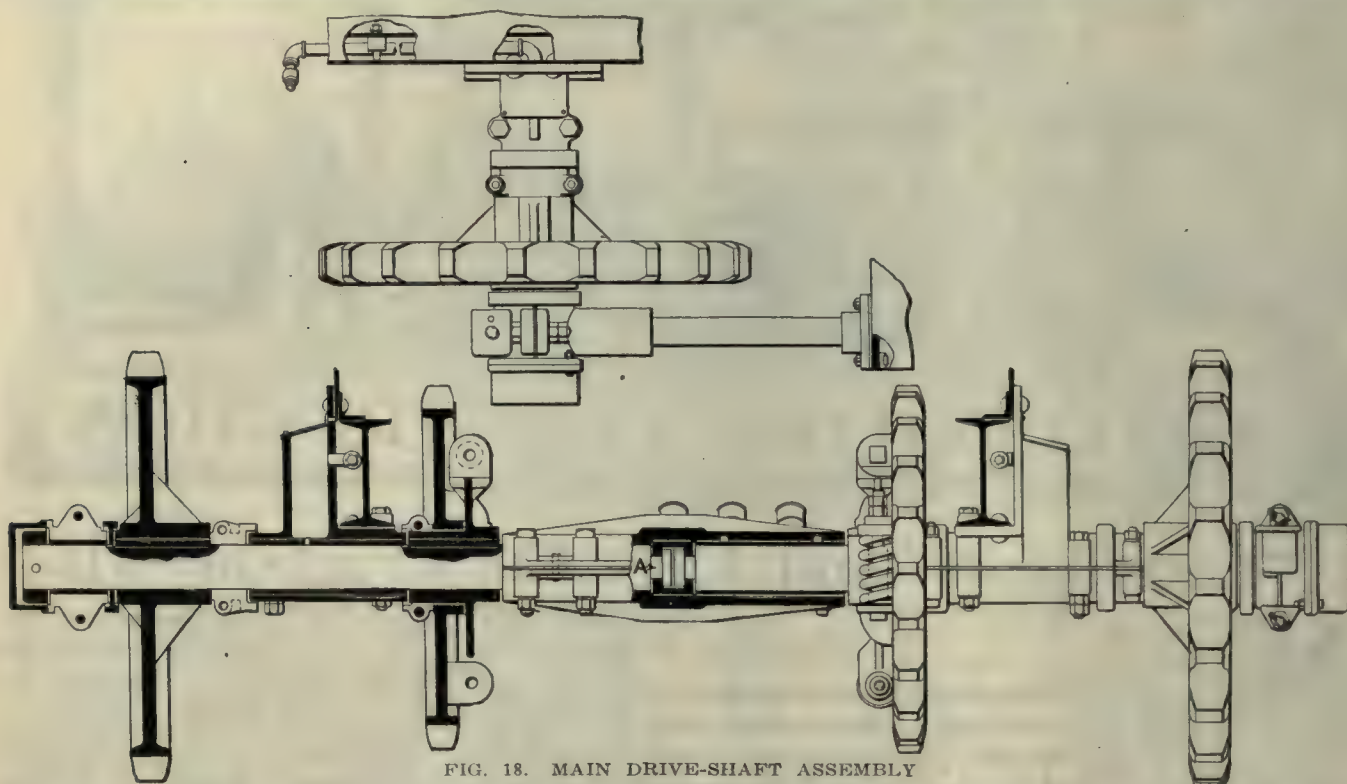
MAIN DRIVE-SHAFT ASSEMBLY
